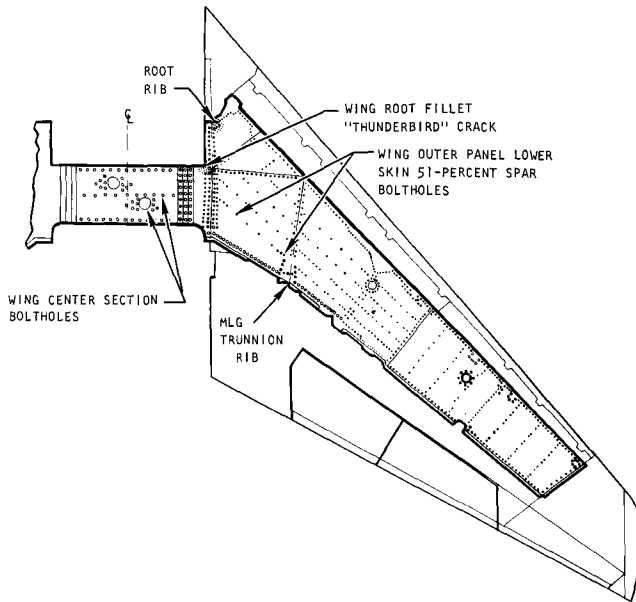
Location of fatigue cracks in F-100 wing structure.
